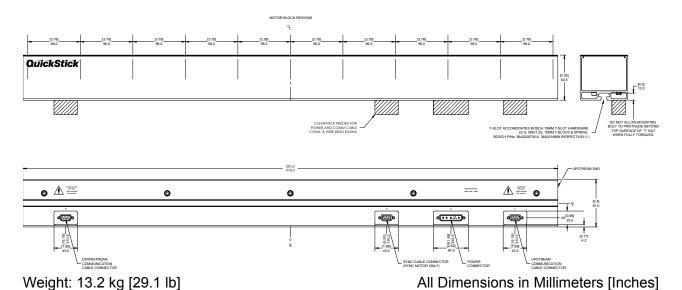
1000 Millimeter Motor Mechanical Drawing
